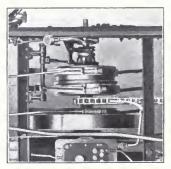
Constriction-Band Clutch, as Used in Reo Car. Reo Motor Car Company, Lansing, Mich.
